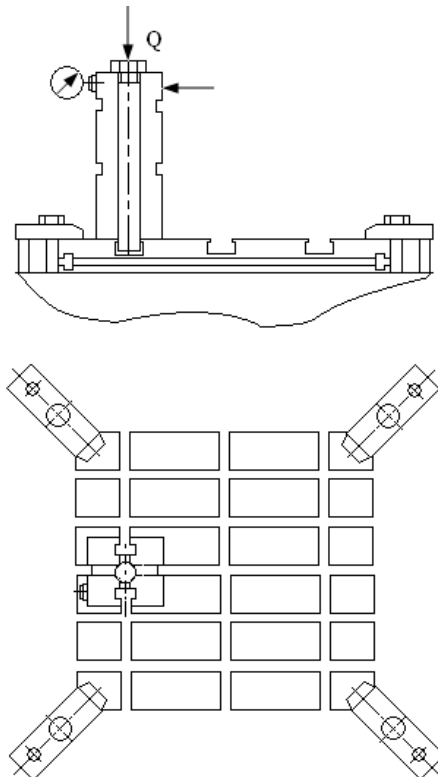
A Basic Assembly Unit of T-Slot-Based Modular Fixture
